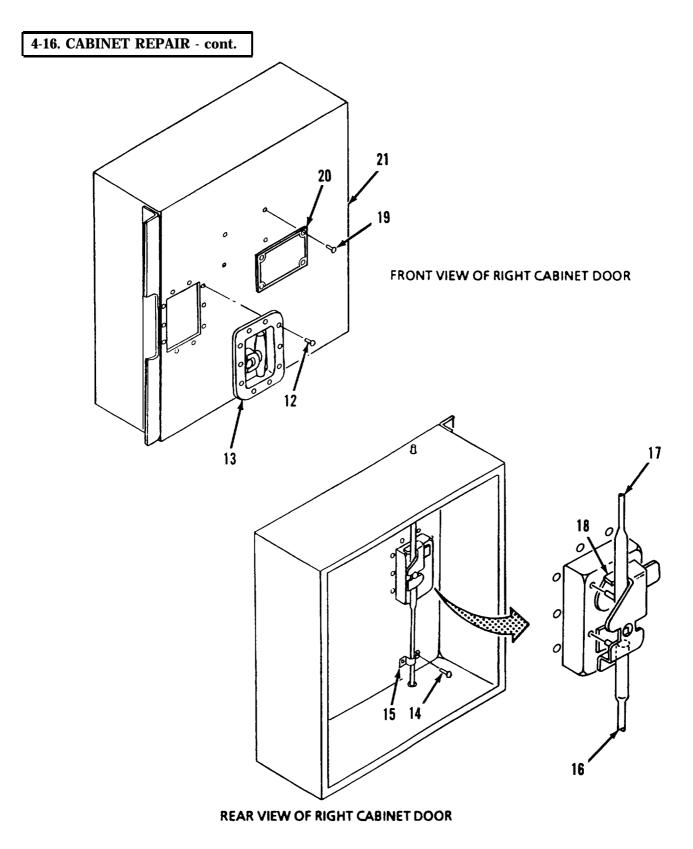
Right Cabinet Door Divider and Lock Installation (Sheet 2 of 2).
